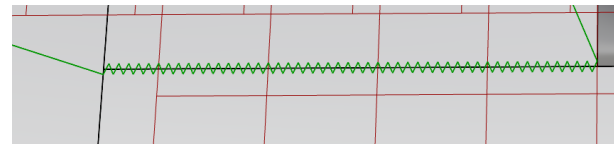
Robot component plugin - GrassHopper - Welding path close up view
